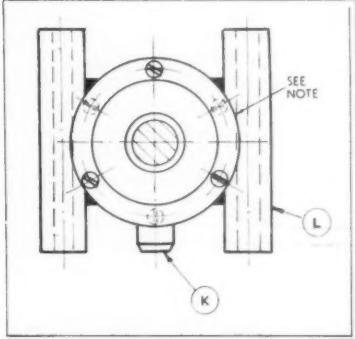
End elevation of the assembled spindle showing how the feet are shaped to fit round the body detail
